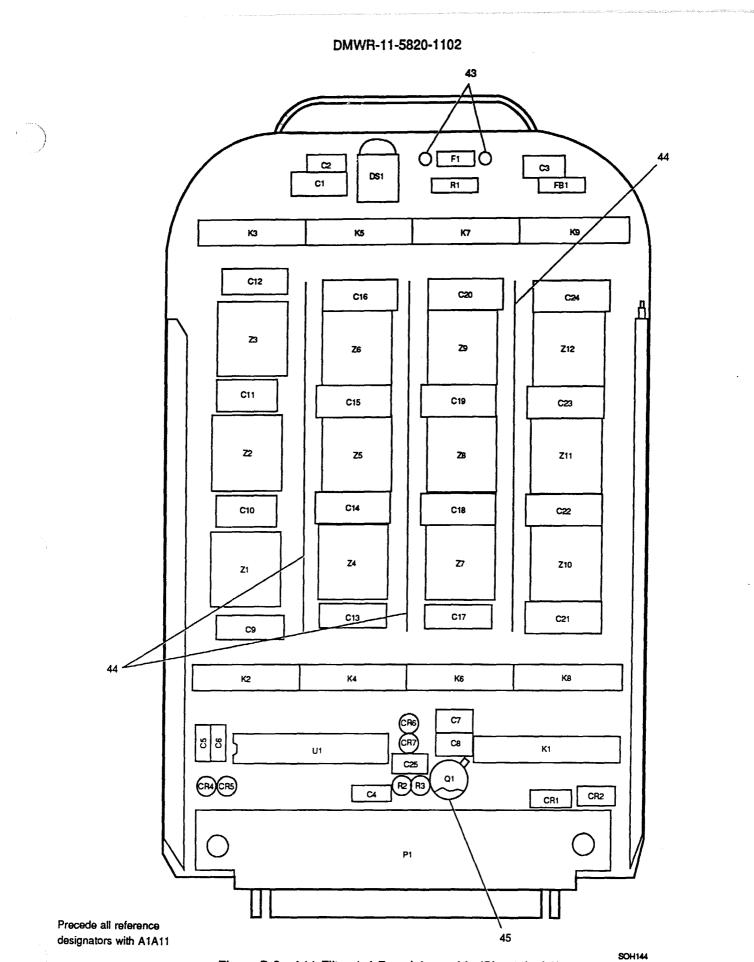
A11 Filter 1-4 Board Assembly (Sheet 1 of 2)
